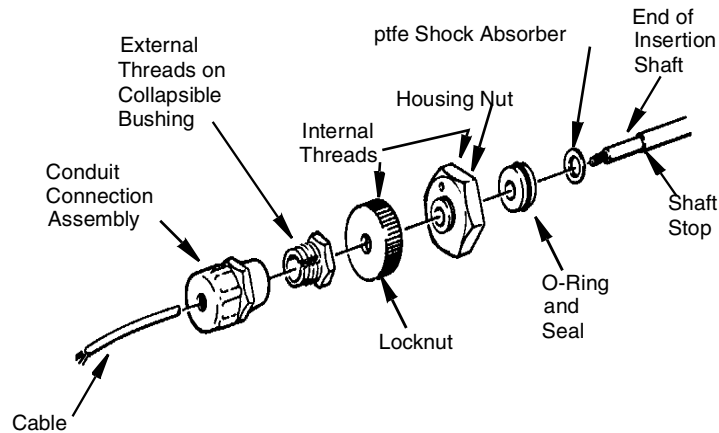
Assembly of Parts Onto Gate-Valve Insertion Sensor Cable
